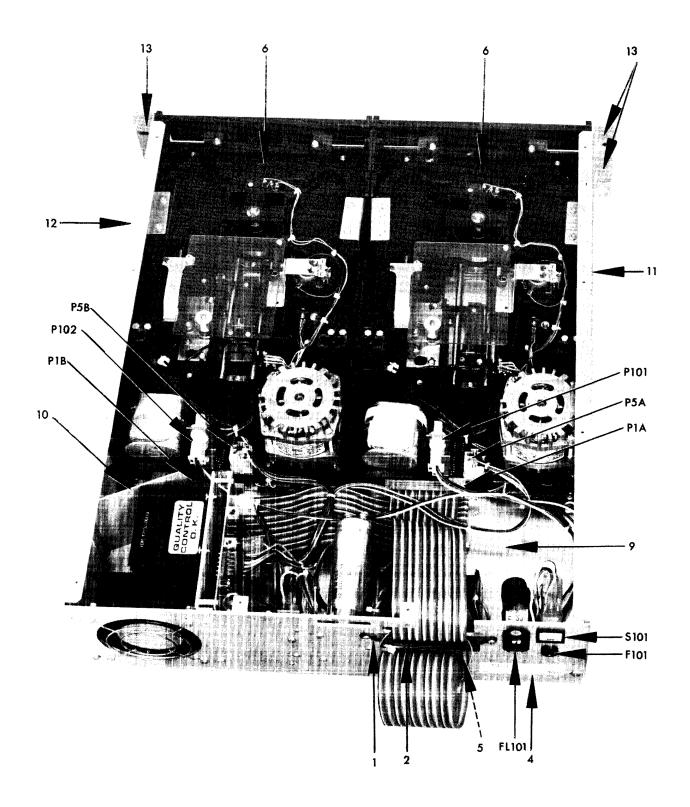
Top View of REMEX 20/814284-XXX. The top view of the REMEX 40/814288-XXX, REMEX 48/814290-XXX and REMEX 24/814286-XXX are similar.
